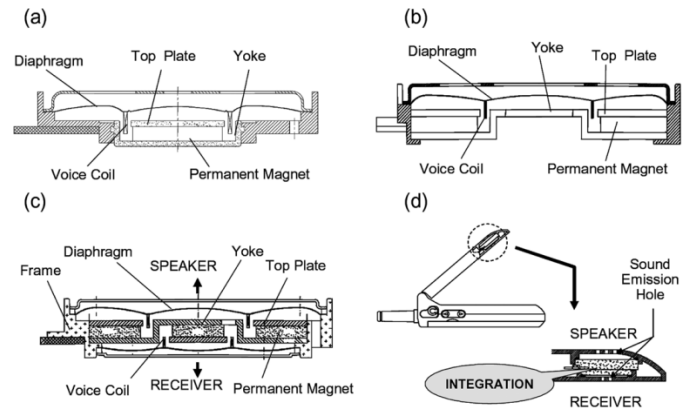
Schematic of the devices and mounting layout: (a) Conventional inner PM speaker. (b) Conventional outer PM speaker. (c) Integrated device. (d) Mounting layout of the integrated device.
